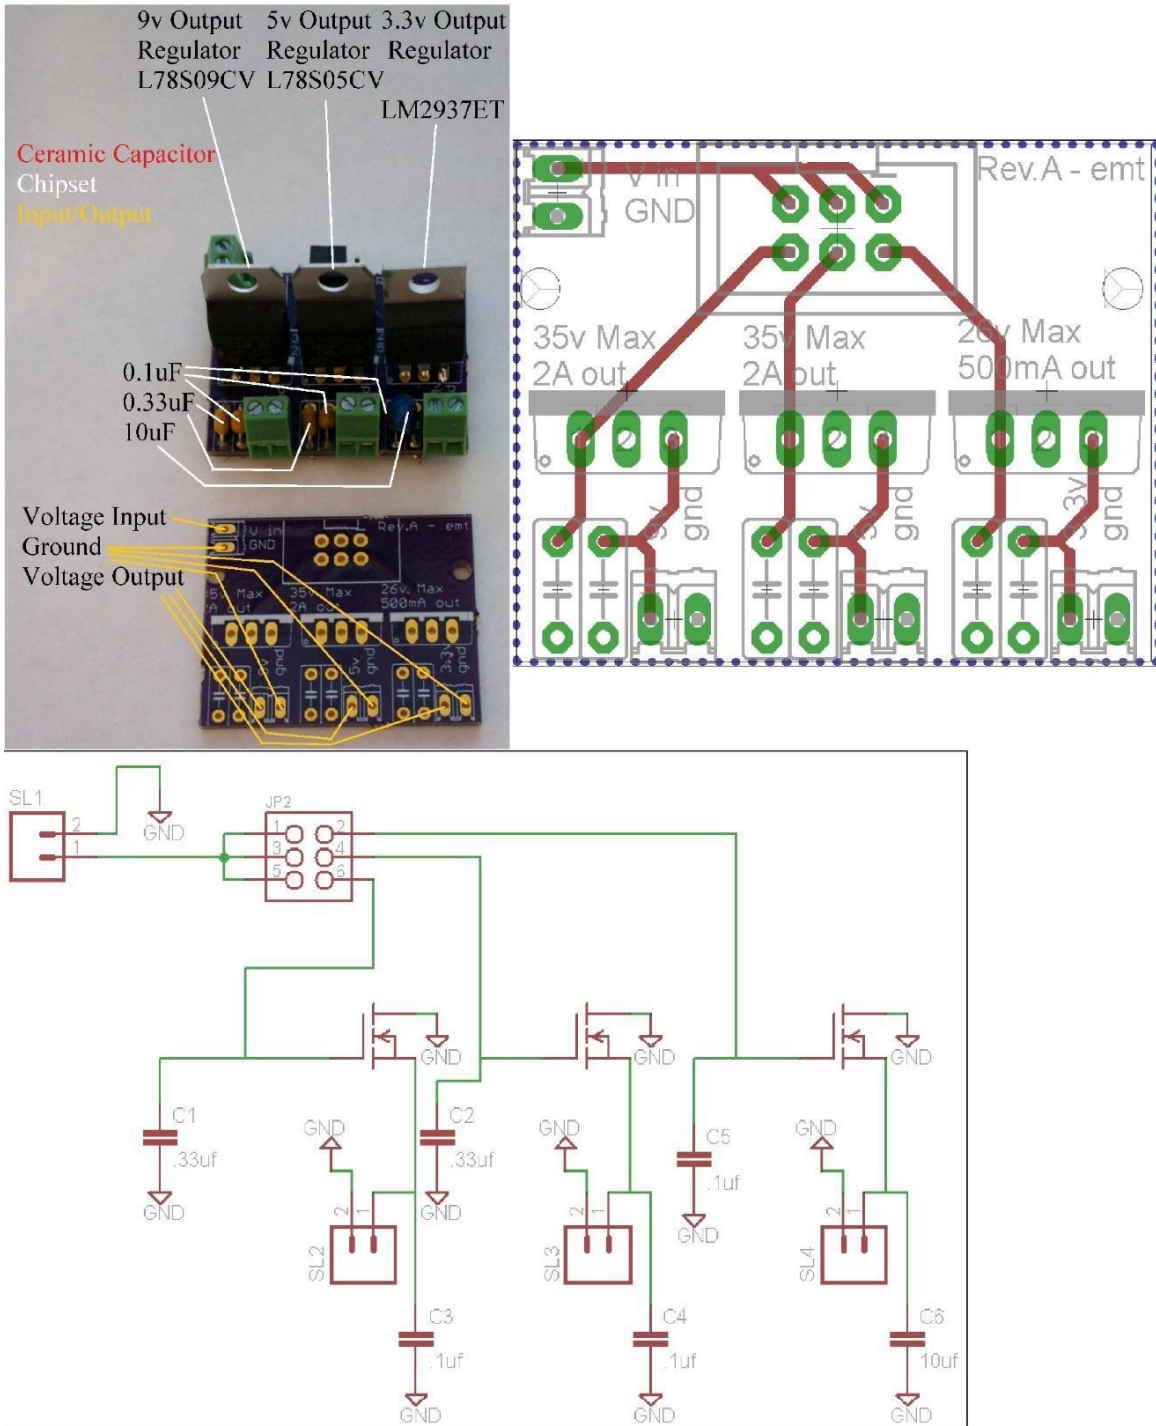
Power supply board details. Populated board, bare board, board layout, and schematic.
